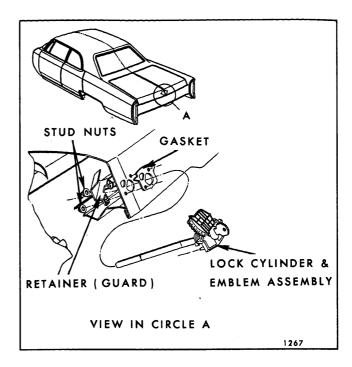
Rear Compartment Lid Lock Cylinder and Emblem Assembly
